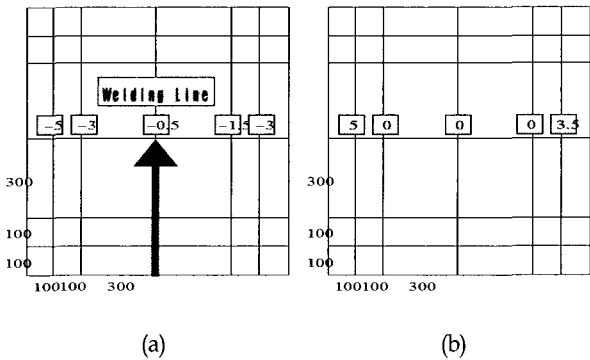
Logitudinal bending distortion of experimental model, in mm. (a) front side 1 layer-welded specimen, (b) back side 1 & 2 layer-welded specimen.
